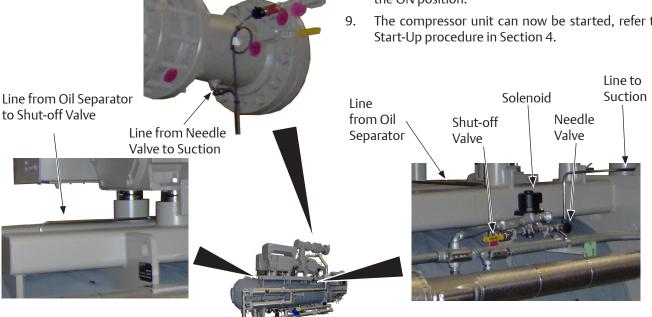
Suction By-Pass Valve Location (Equalizing Solenoid) (2 of 2)
